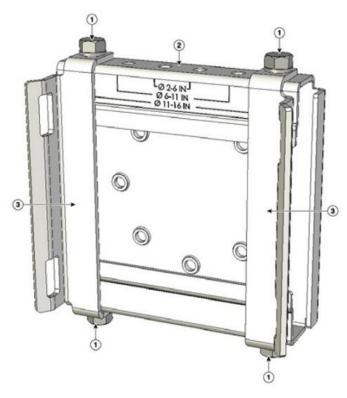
Pole Clamp Bracket Adjustment Hole Locations
